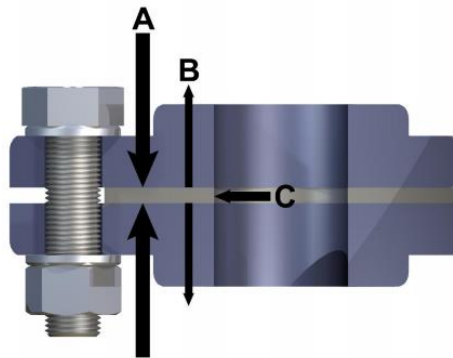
Forces acting in the flange assembly - A = flange load; B = hydrostatic end load; C = internal pressure
